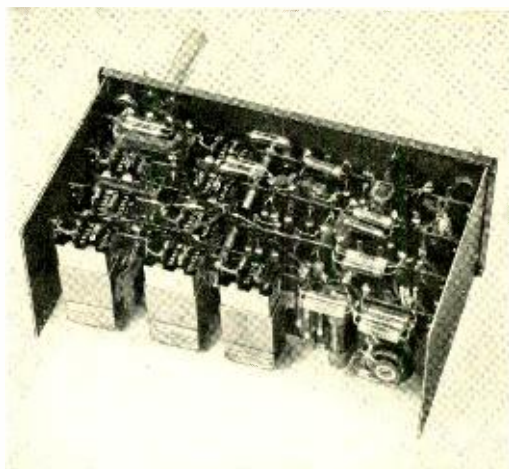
Assembly of a loss equalizer using CAB inductors.
